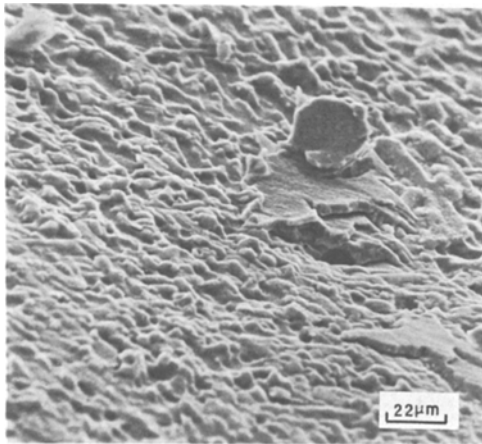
Detailed view of the grain surfaces from the fracture surface in Fig. 7.
